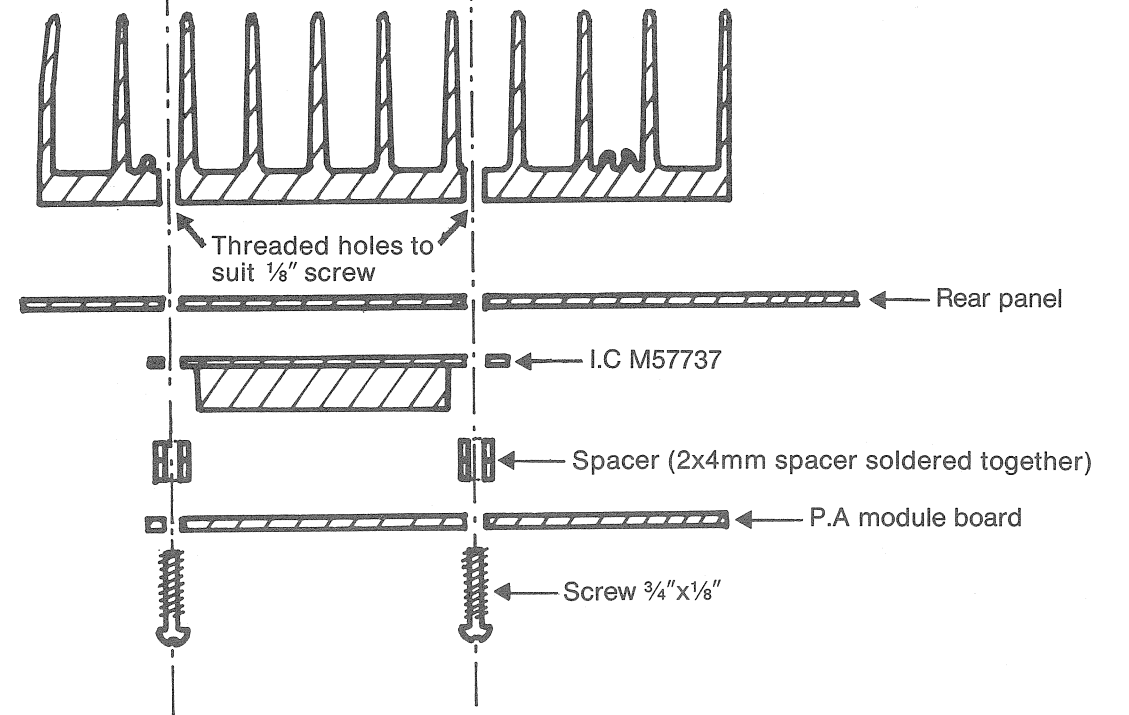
Mounting of the heatsink, rear panel, IC, spacers and PA module board.
